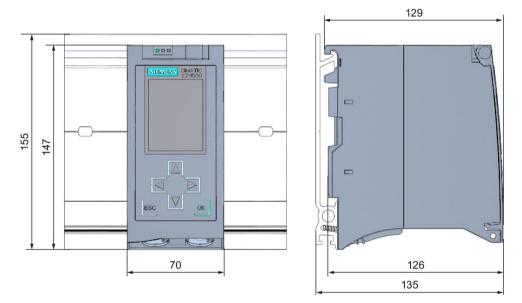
Dimension drawing of the CPU 1515R-2 PN, front and side view
